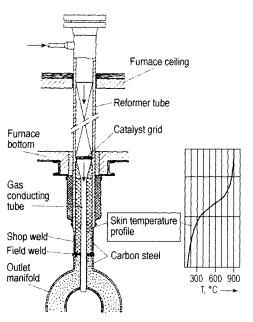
Reformer tube to manifold connection in the Uhde reformer
